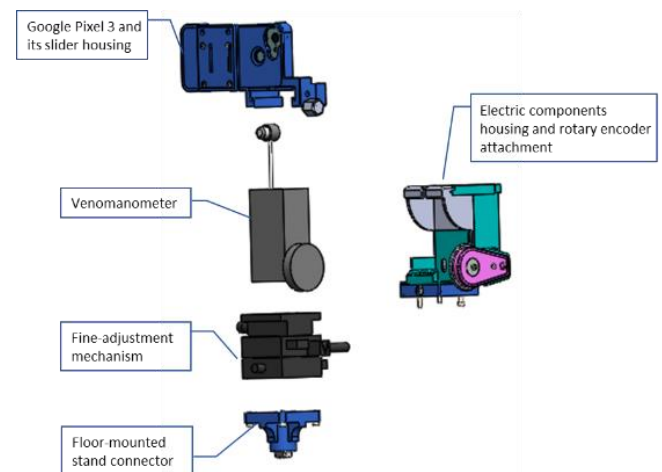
AN EXPLODED VIEW OF THE PROTOTYPE SUBASSEMBLY.
